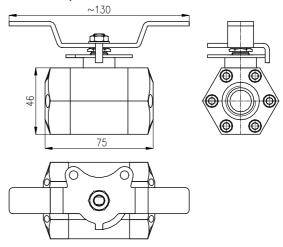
BALL VALVE DIRECT WITH TERMINALS , DIMENSIONAL DRAWING
